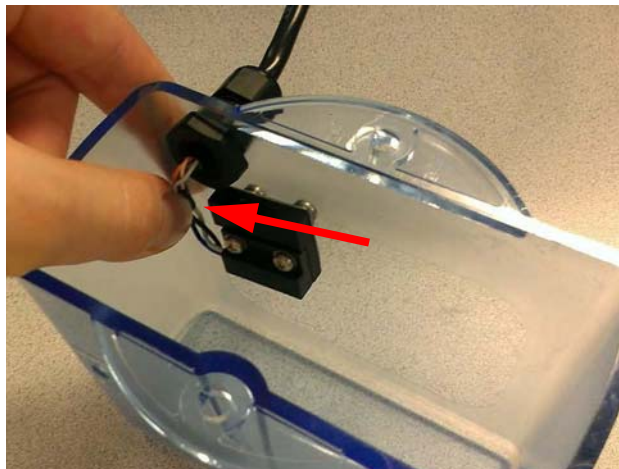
19. Gently Move Cable To Provide Clearance For Index
